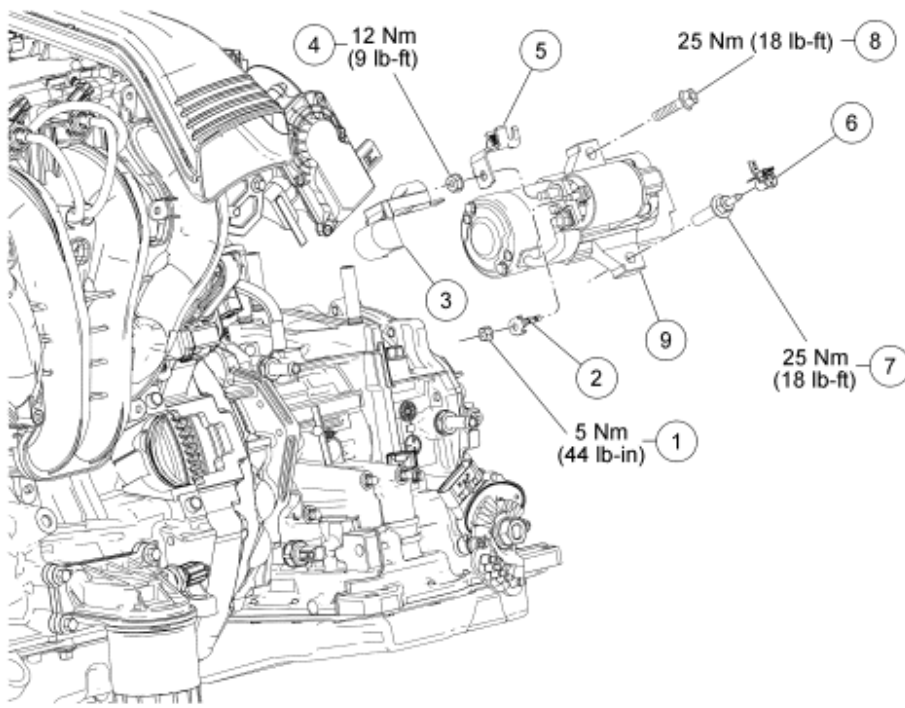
Exploded View Of Starter Motor With Torque Specifications - 2.3L
